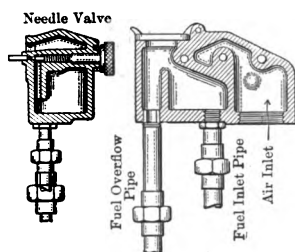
Carbureter, Fairbanks-Morse Type T Engine.
